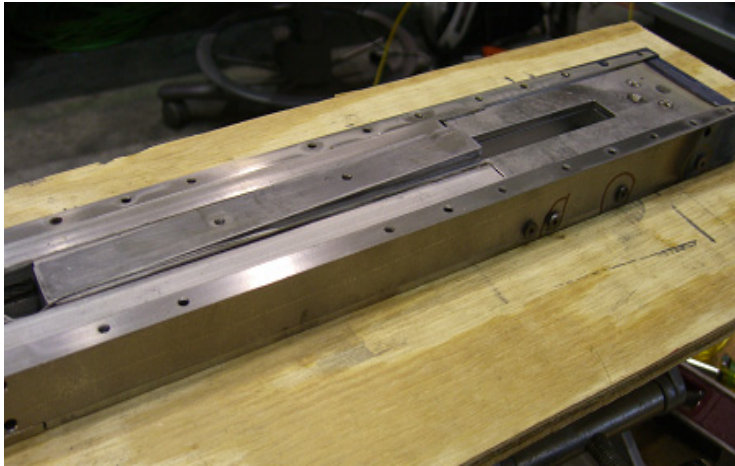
(a) After removing the top plate holding the pieces together the central spacer is carefully removed. The probe is sitting on the side where the surface of the U-bend section is in contact with the bottom plate.
